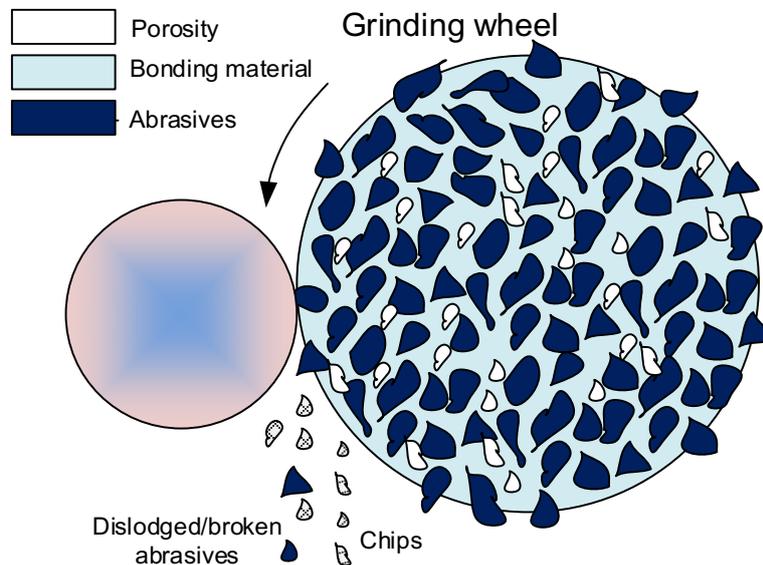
Schematic diagram showing a grinding wheel and its interaction with the workpiece.
